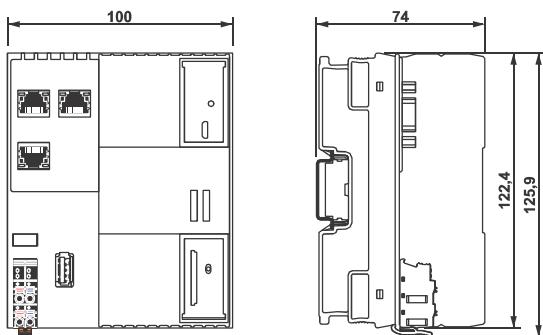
Nominal dimensions of a class 3000 AXC controller housing
